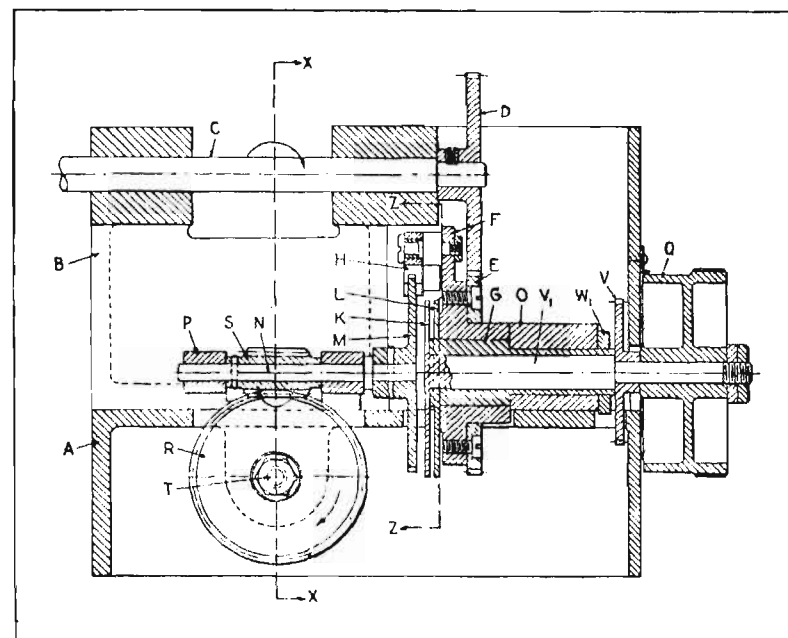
Section Y-Y of Fig. 2 Showing Train of Mechanism between Drive Shaft C and Feed Screw T.
